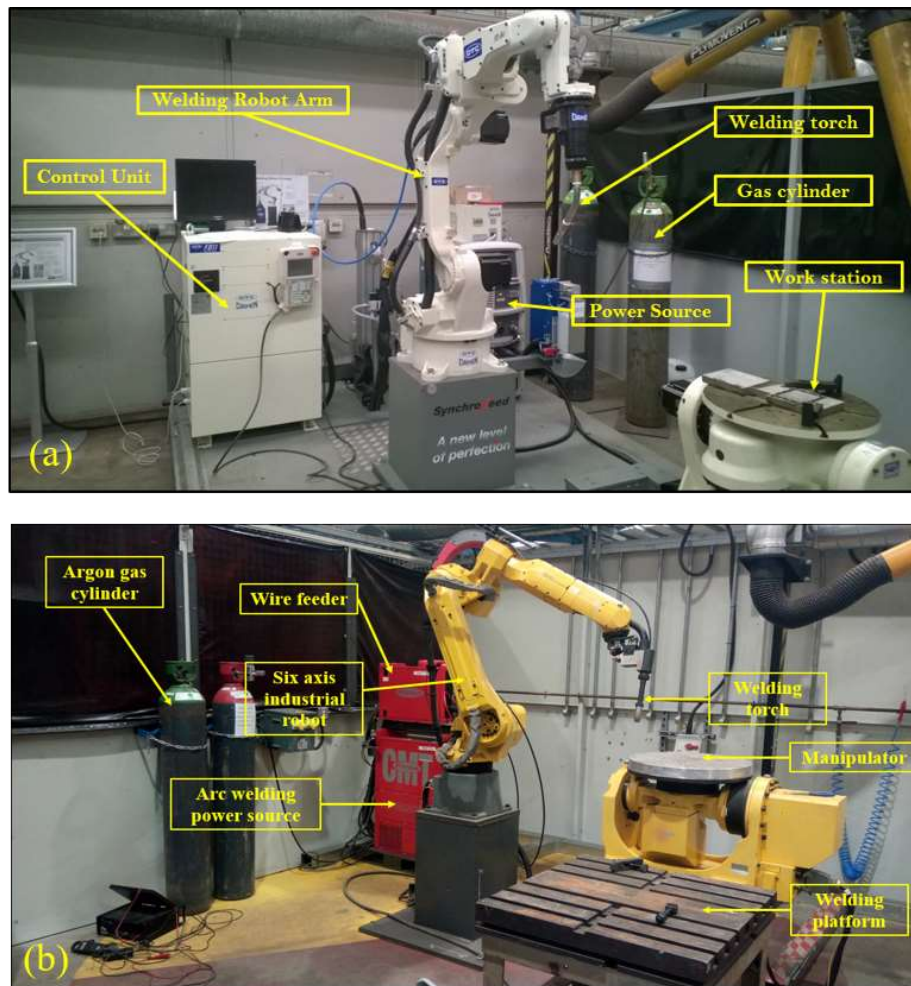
Welding robot (a) OTC Daihen Synchrofeed welding robot for pulsed metal inert gas (MIG) technique (b) Fronius CMT-Fanuc work station for cold metal transfer (CMT) technique
